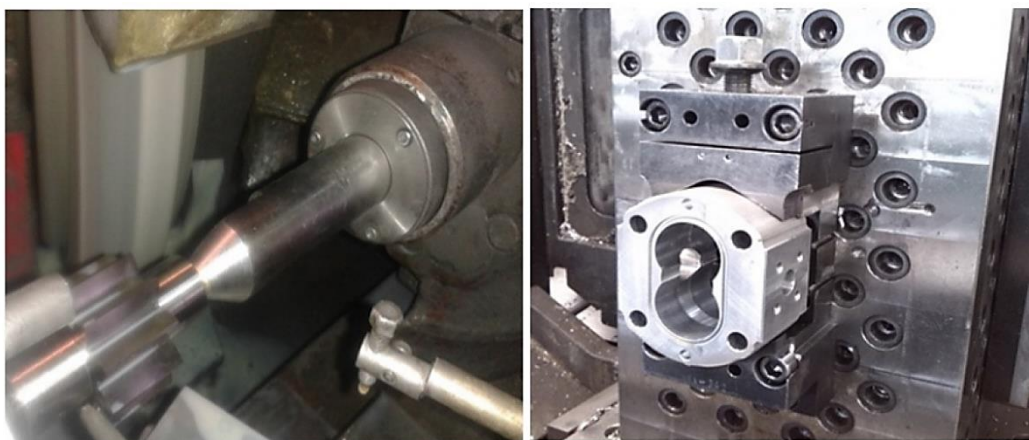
Grinding of journals on the claw grinder - detailing driven and driven gears, clamping of the body made on the CNC machine - pump body.
